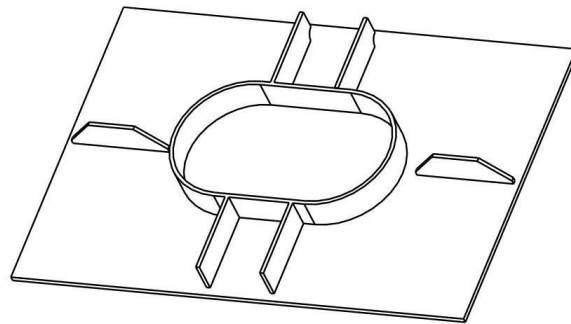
(1) Forms of Butt Welding Specimens
